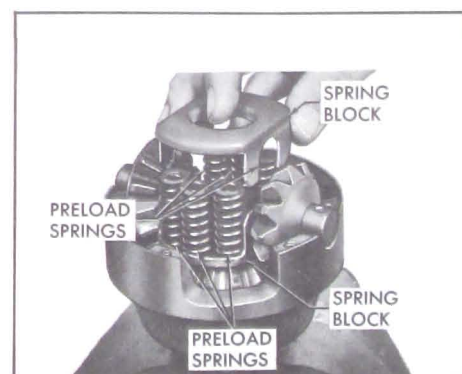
Installing Preload Springs and Second Thrust Block Into Differential Case
